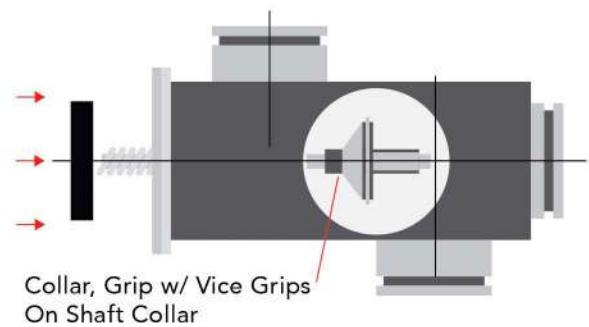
CLAMP COLLAR OF VALVE SHAFT W/ VICE GRIPS
